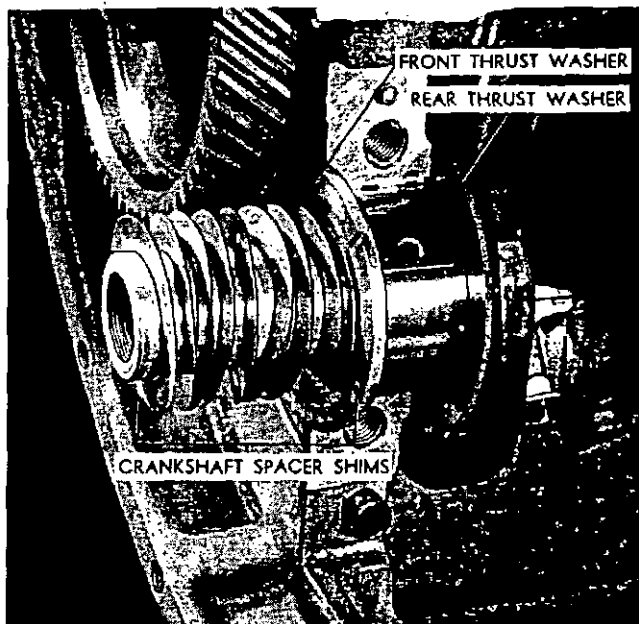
Thrust Washers & Shims Controlling Crankshaft End Play
